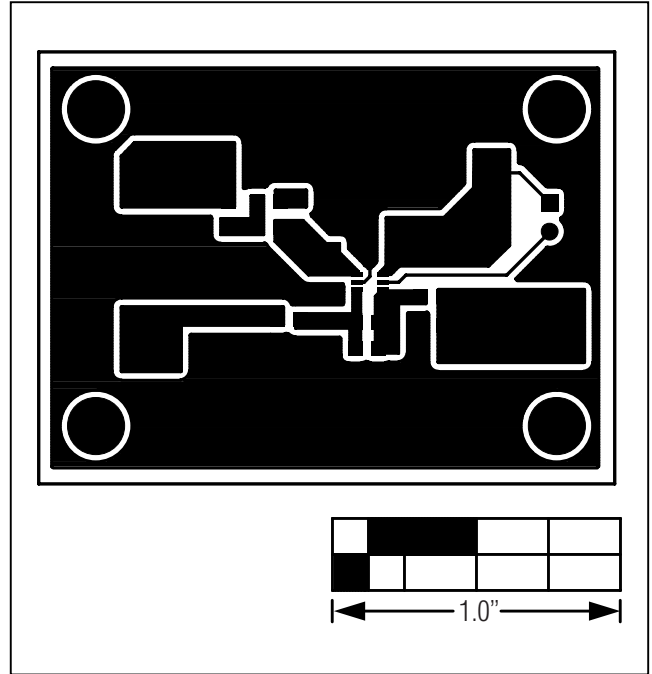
MAX9613 EV Kit PCB Layout—Component Side
